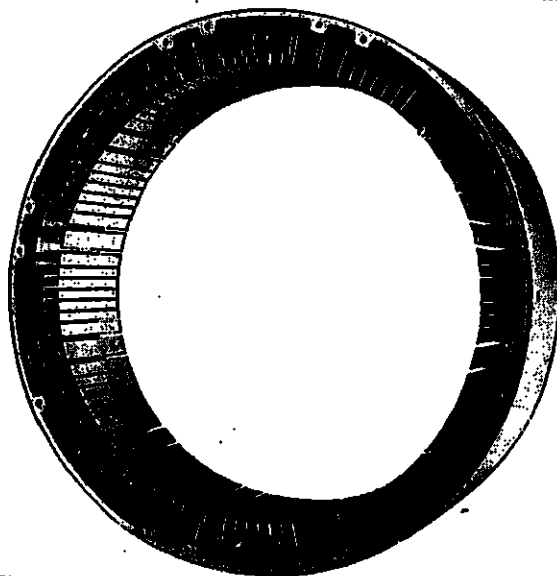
Finished stator core for single-phase series motor type KJ 136.
